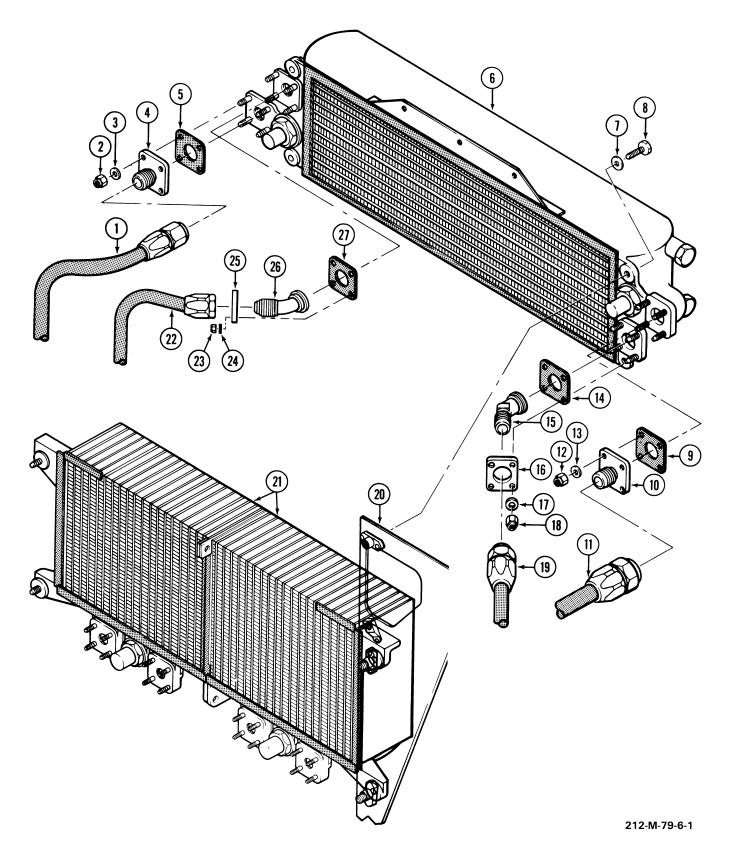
Combining gearbox and transmission oil cooler (sheet 1 of 2)
